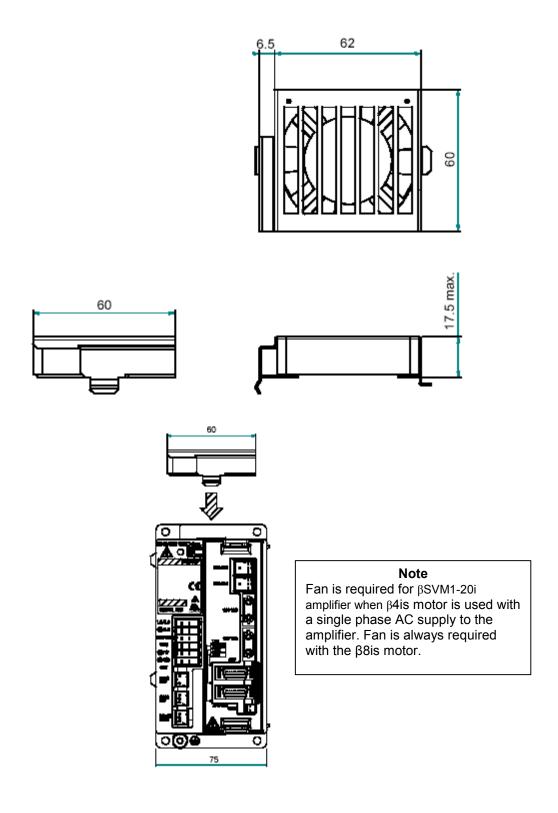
External Dimensions of Optional Cooling Fan Unit (ZA06B-6134-K003)
